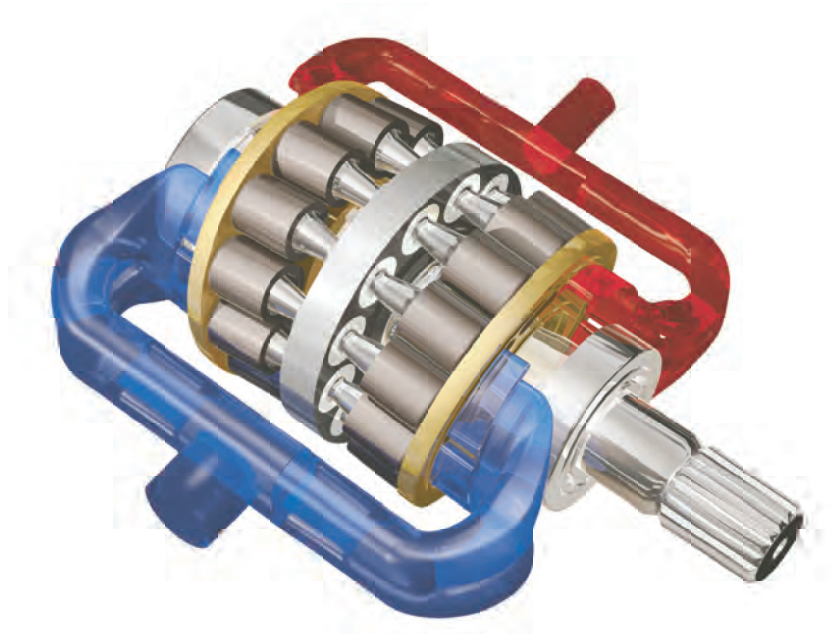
The ducts inside the 28 cm³ Floating Cup pump prototype
